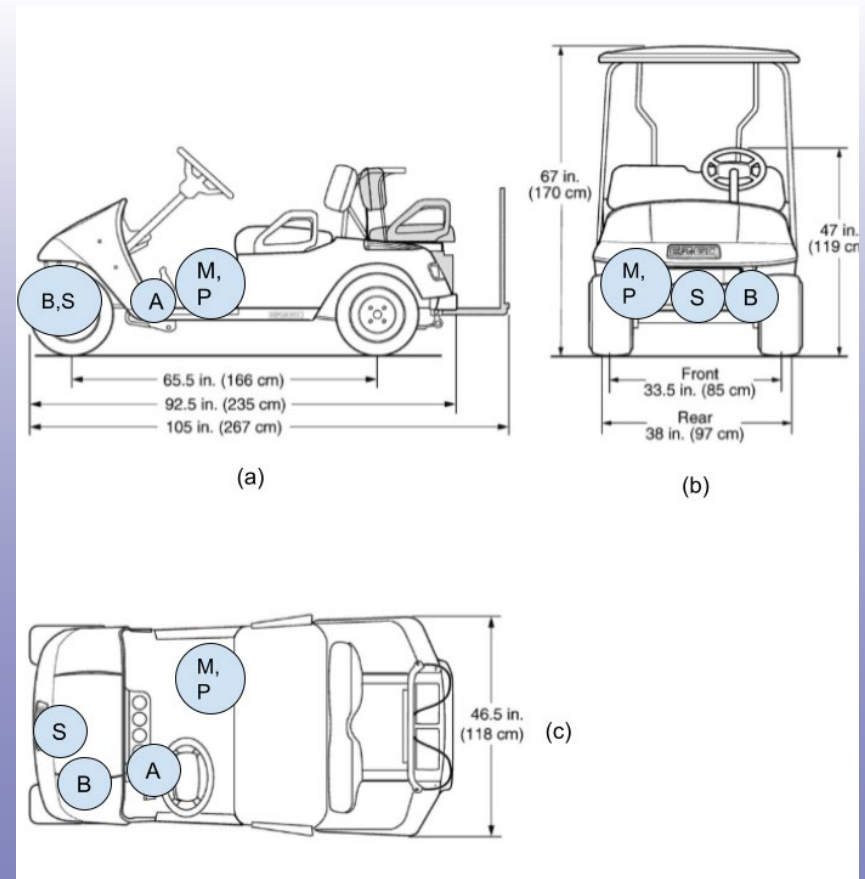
RC golf cart device mounting locations (a) side view; (b) rear view; and (c) top view.
